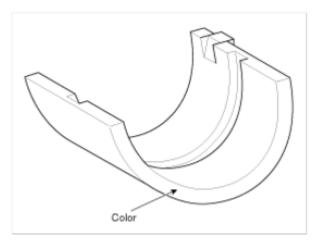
Crankshaft Main Bearing Color Location Courtesy of HYUNDAI MOTOR AMERICA
